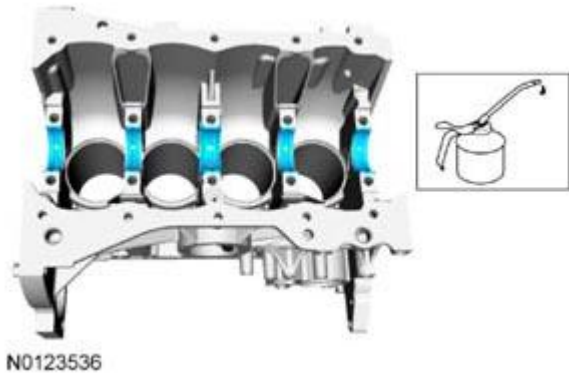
Lubricating Upper Crankshaft Main Bearings
